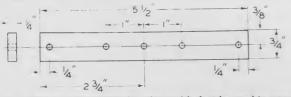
Outline drawing of Mycalex plug-and-jack strips used to mount the 812 plate coils. The jack strip is mounted directly on two opposite stator terminals of the condenser by two aluminum brackets. The end jacks go through both base strip and mounting brackets, thus forming the coll-condenser leads. * More capacitance must actually be used, because the minimum capacitance of C_{12} is * 13 $_{\mu\mu}$ 1.
